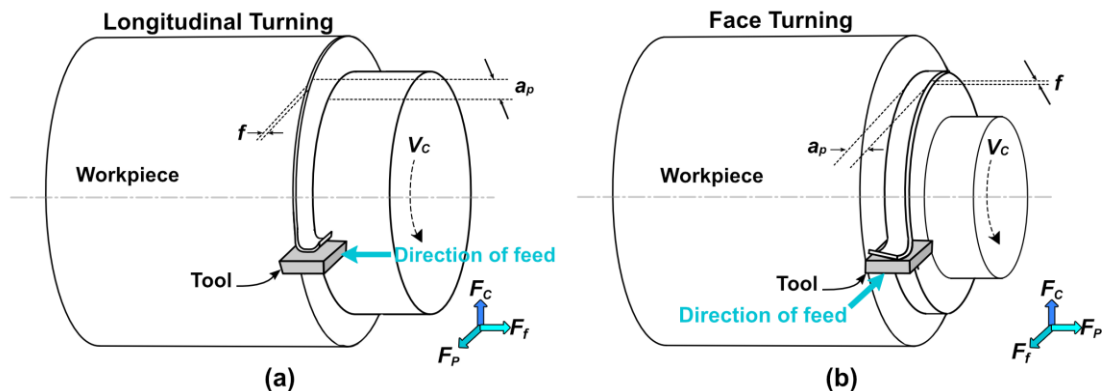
Schematic illustrating (a) longitudinal turning and (b) face turning showing the main cutting parameters: cutting speed V_c , feed f and depth of cut a_p .
